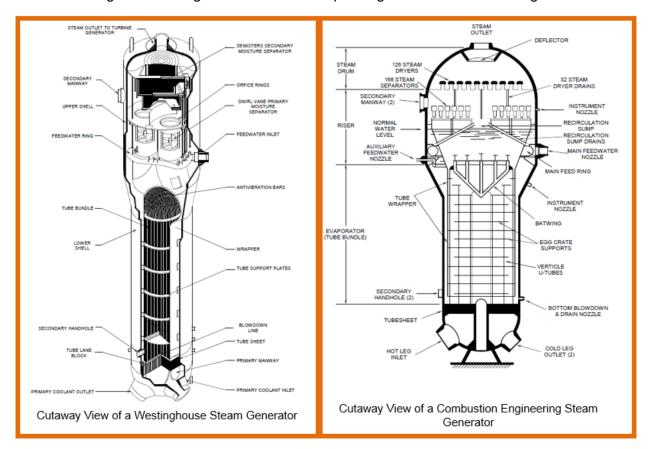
Cutaway views of Westinghouse and Combustion Engineering U-tube steam generators
